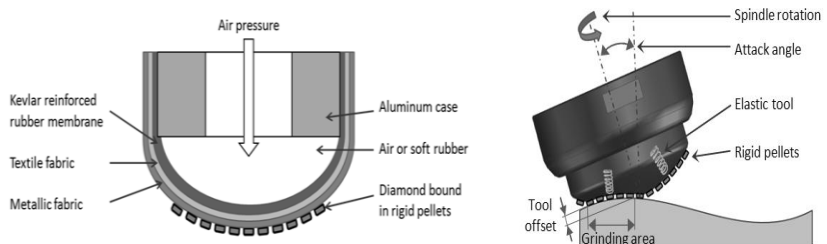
Multi-layer design of SAG tool (left) and principle of operation (right) [14].
